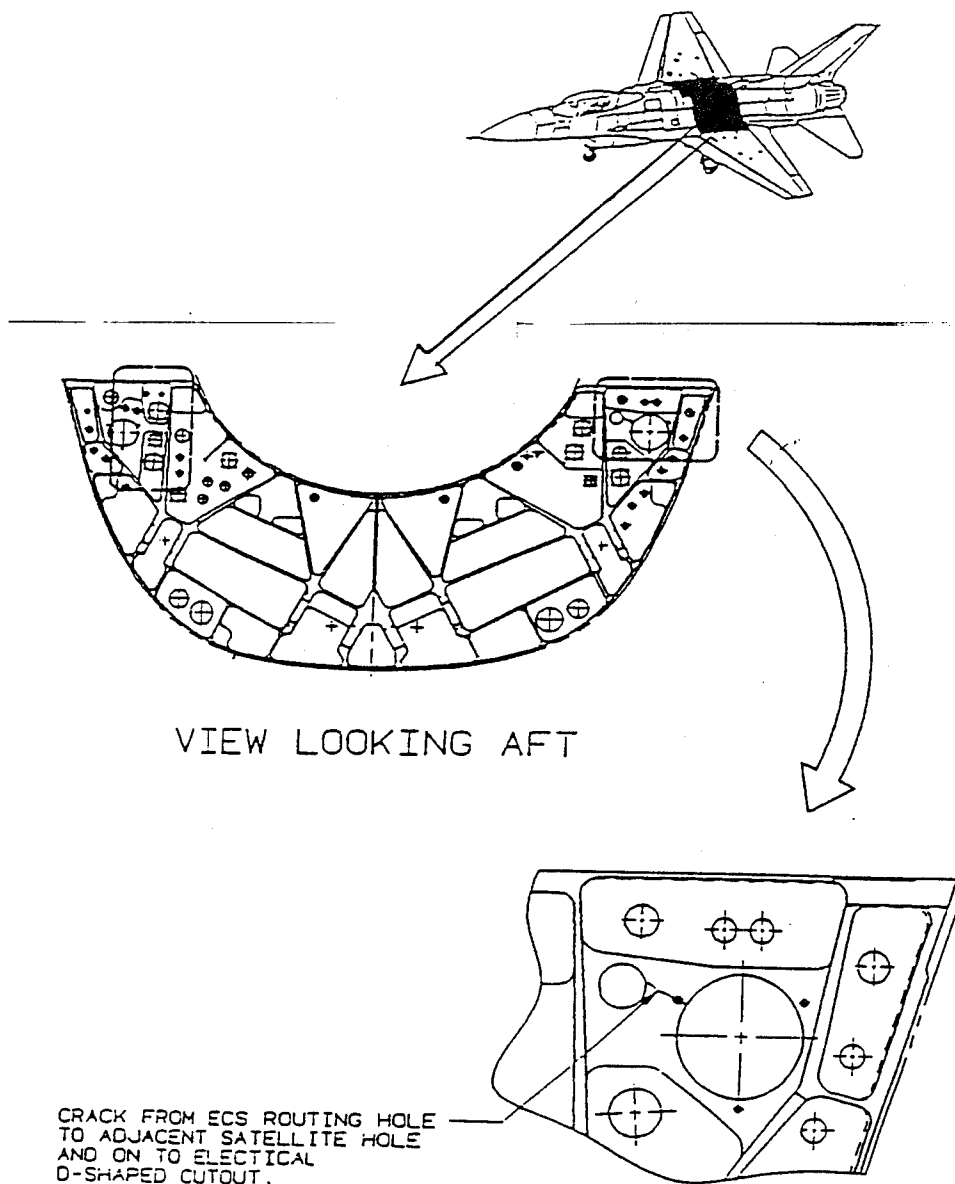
General description of the lower bulkhead panel cracking problem.
